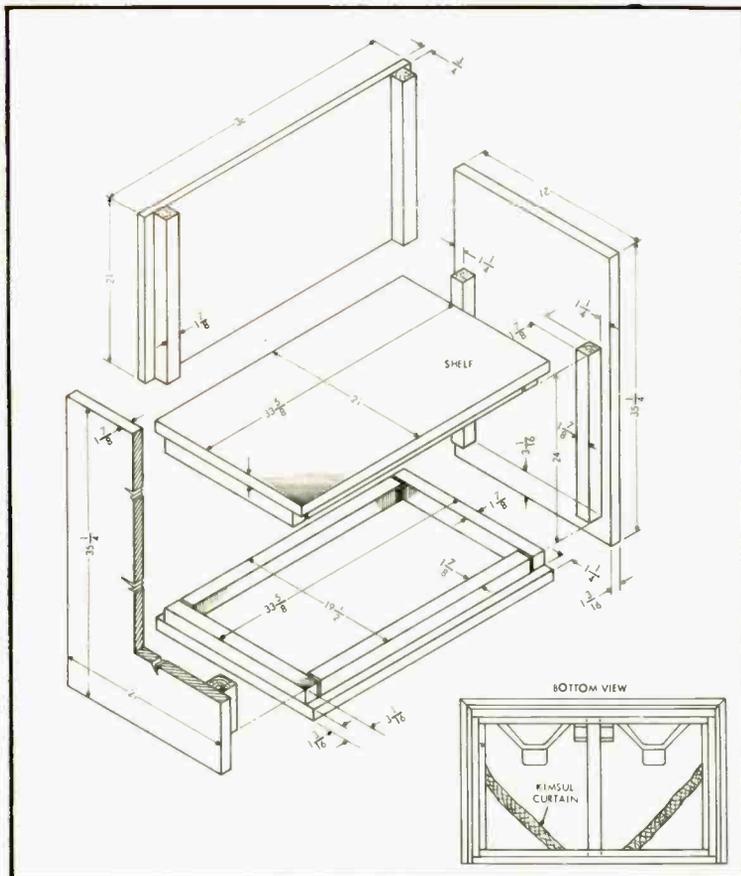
Isometric view highlights simple building method. Heavy strips are secured to flats as in pallet or skid type construction. They reinforce corners when panels are fitted together. Inset shows placement of Kimsul curtains to eliminate internal standing waves.
